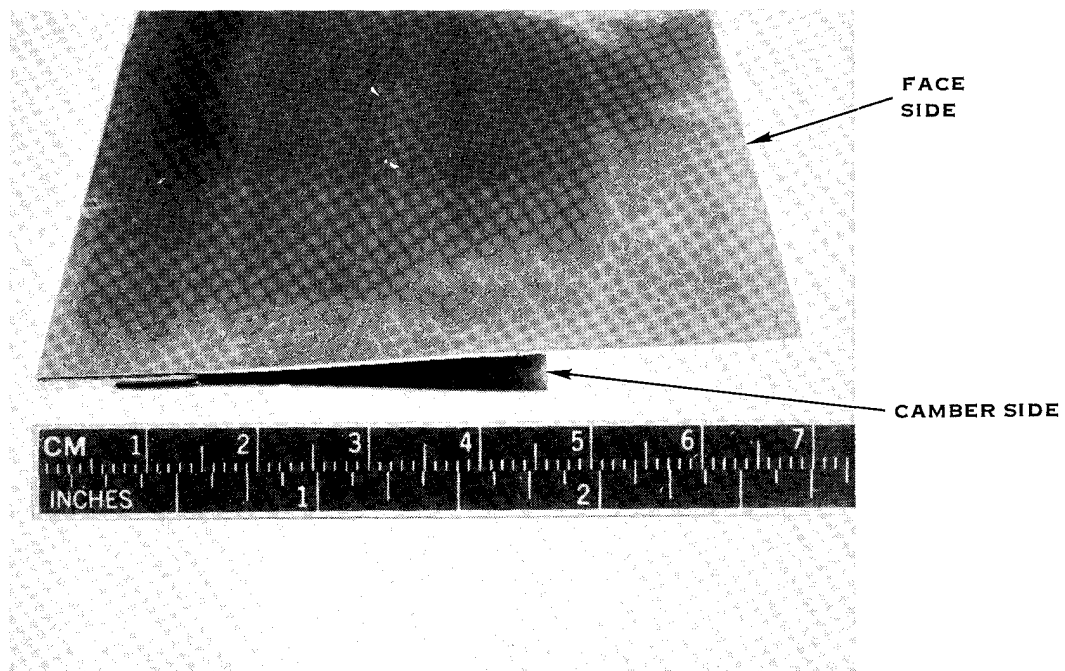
END VIEW OF DIFFUSION BONDED SHEATH ASSEMBLY
